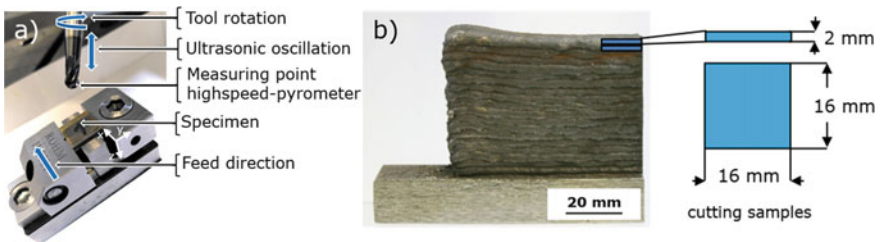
a Experimental setup, b the exemplary sampling and the specimen dimensions
